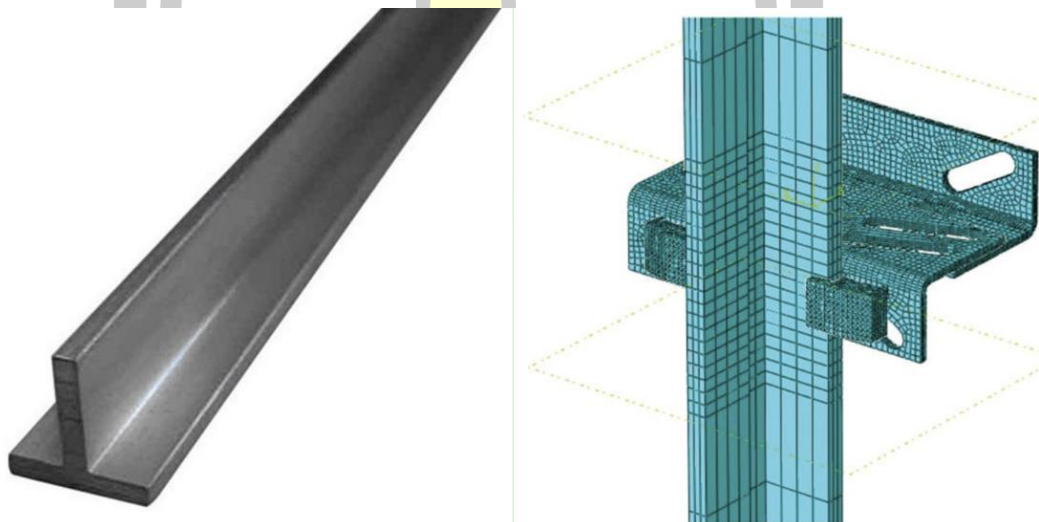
Shape of Elevator Guideway (T- and L-shaped)
